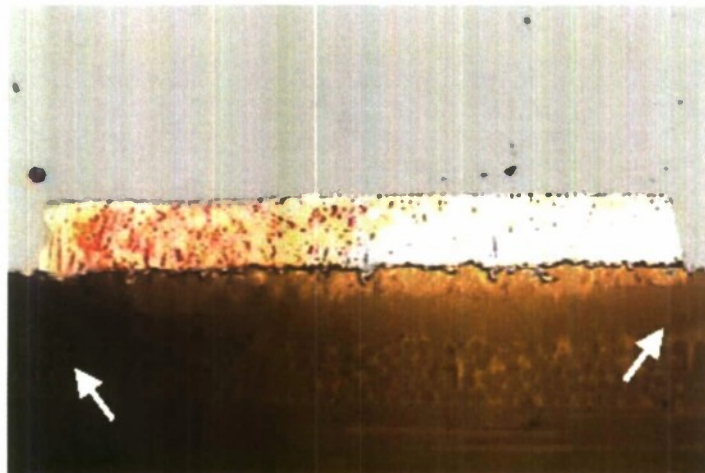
Crack in board resin underneath pad (thick dark area), no edge bond
